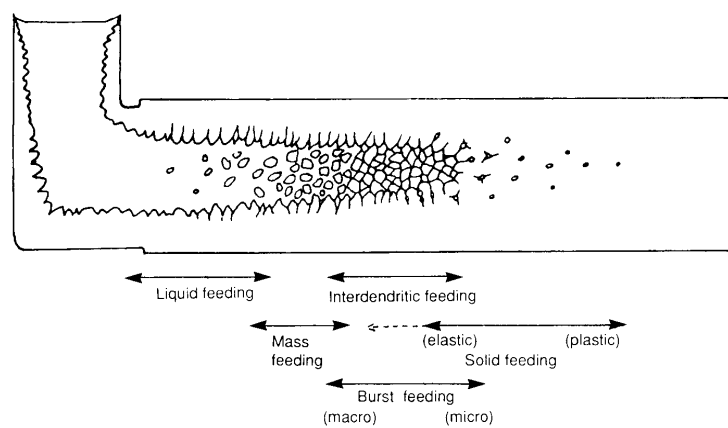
Feeding mechanisms in a solidifying casting [5]
